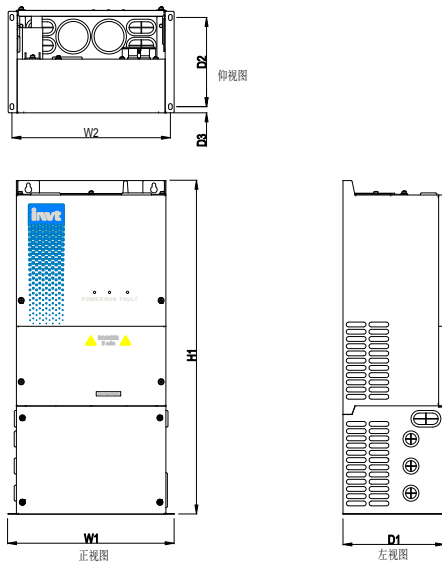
Floor installation (w/o top cover) for 220V 7.5–45kW/380V 15–90kW
